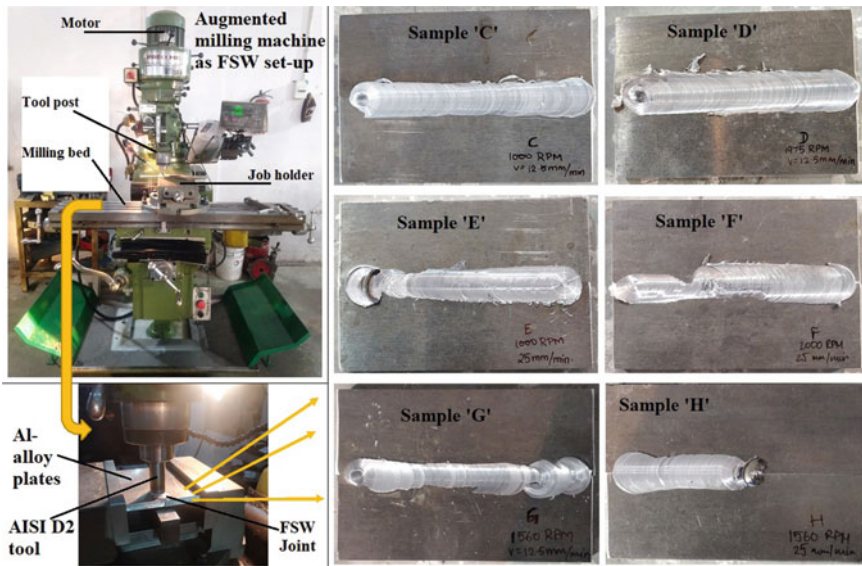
FSW experimental setup; six pairs of plates were welded at different tool rotational and welding speeds
